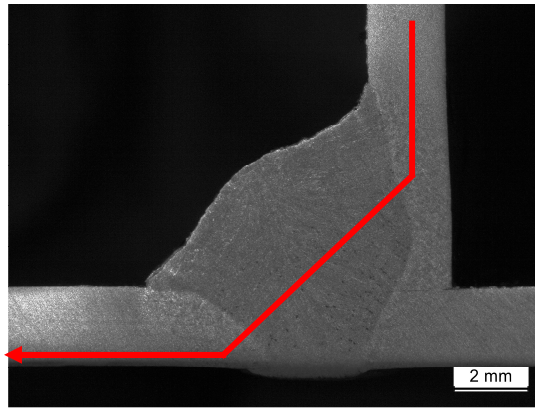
Hardness test of the 2mm fillet weld sample
